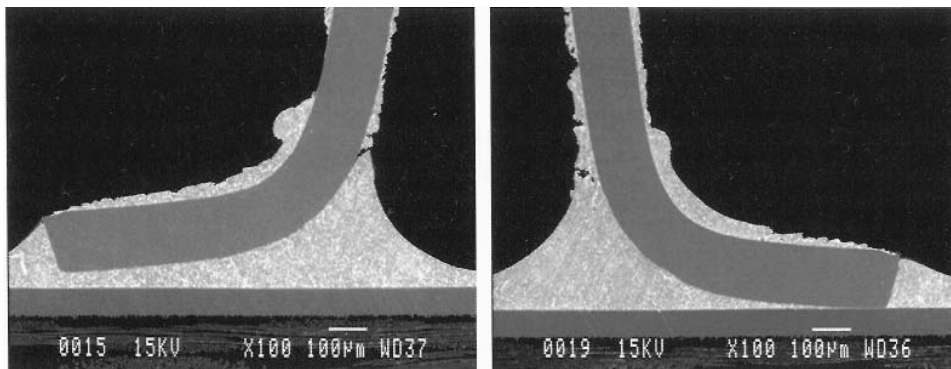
Microsections of centre solder joints on the reference board without staking compound
